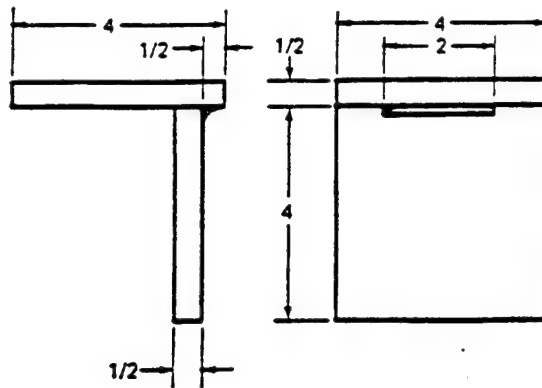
Fillet-weld-break specimen—tacker qualification
